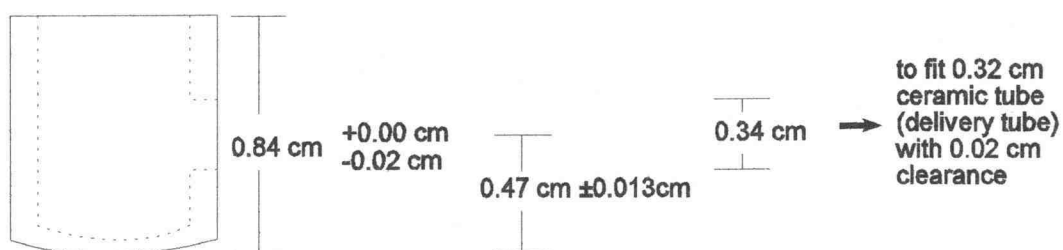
Manufacturing drawing of delivery tube to be used with liquid samples.
